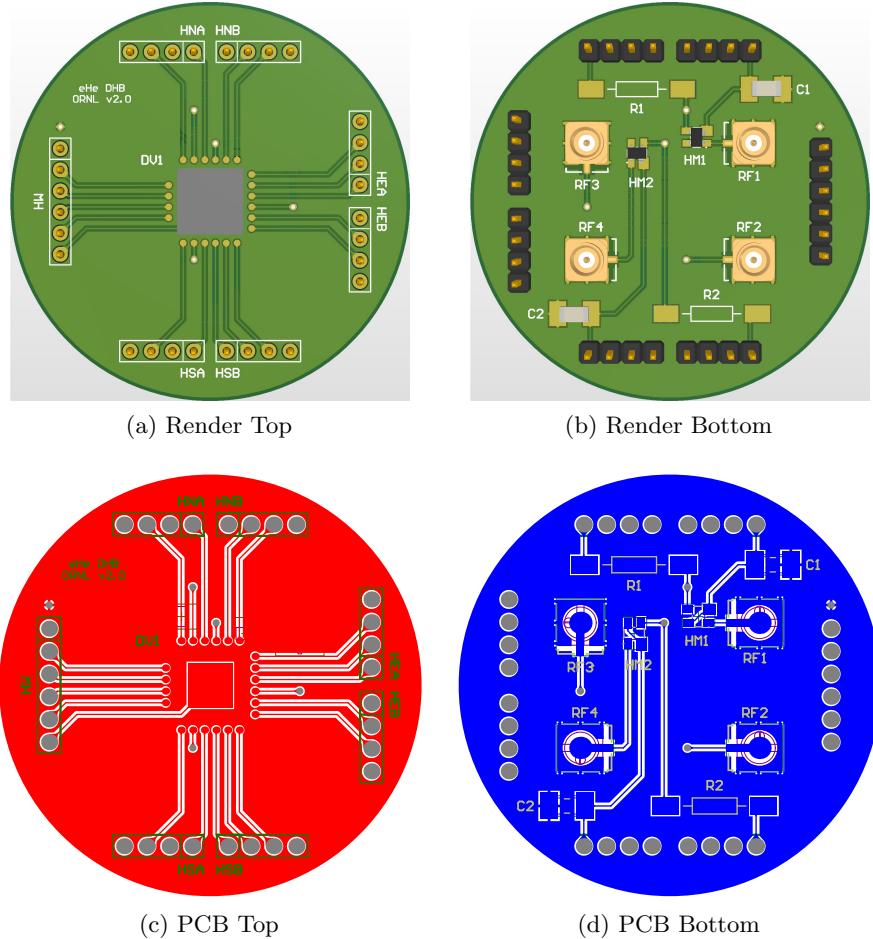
Here (a) and (b) show renders for the top and bottom of the Device Holding Board. (c) and (d) show the PCB designs for the top and bottom sides of the board.
